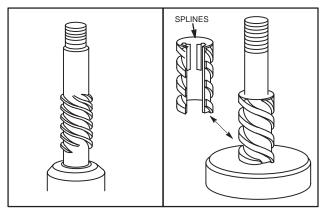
ASSEMBLING STARTER MOTOR DRIVE
